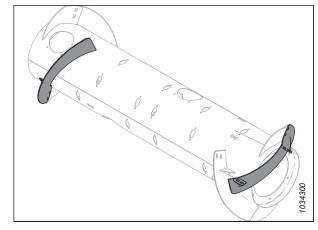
Feed Auger High-Wear Flighting Extension Kit
